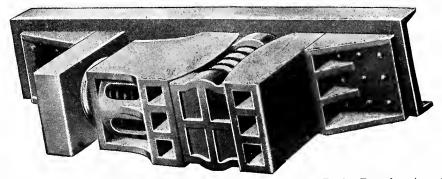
Butler Friction Draft Gear No. 350 with One Draft Sill Removed. Butler Drawbar Attachment Company.
